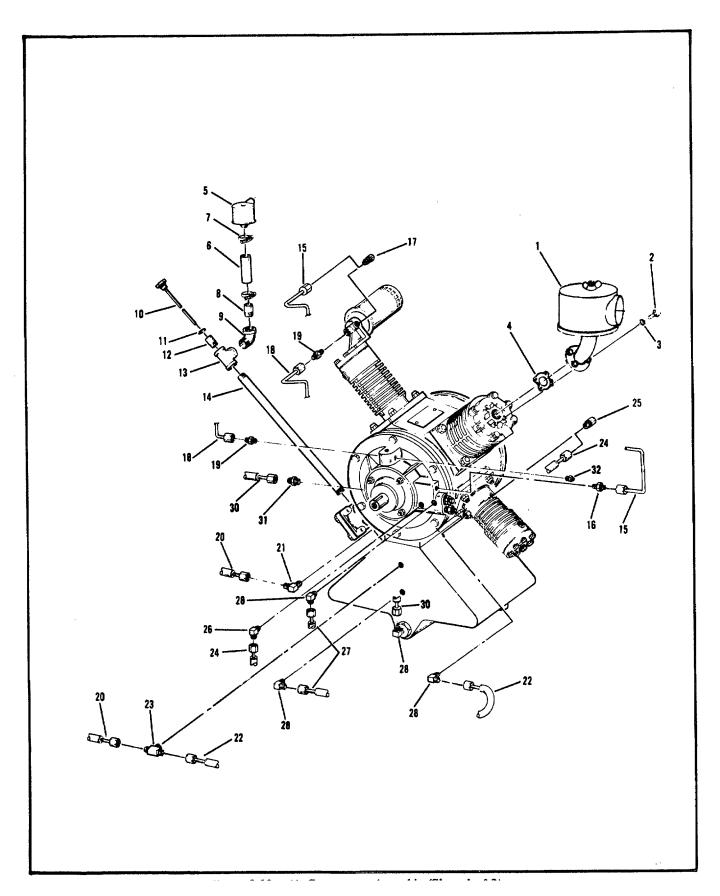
Air Compressor Assembly (Sheet 1 of 3)
